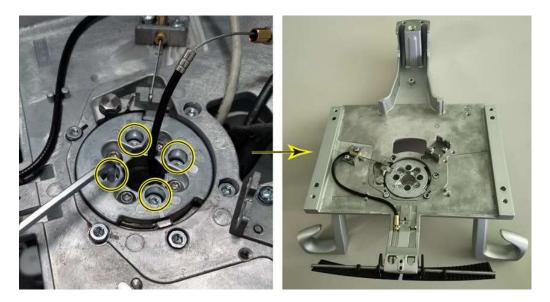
Unscrew screws - remove KB Base Interface Assy
